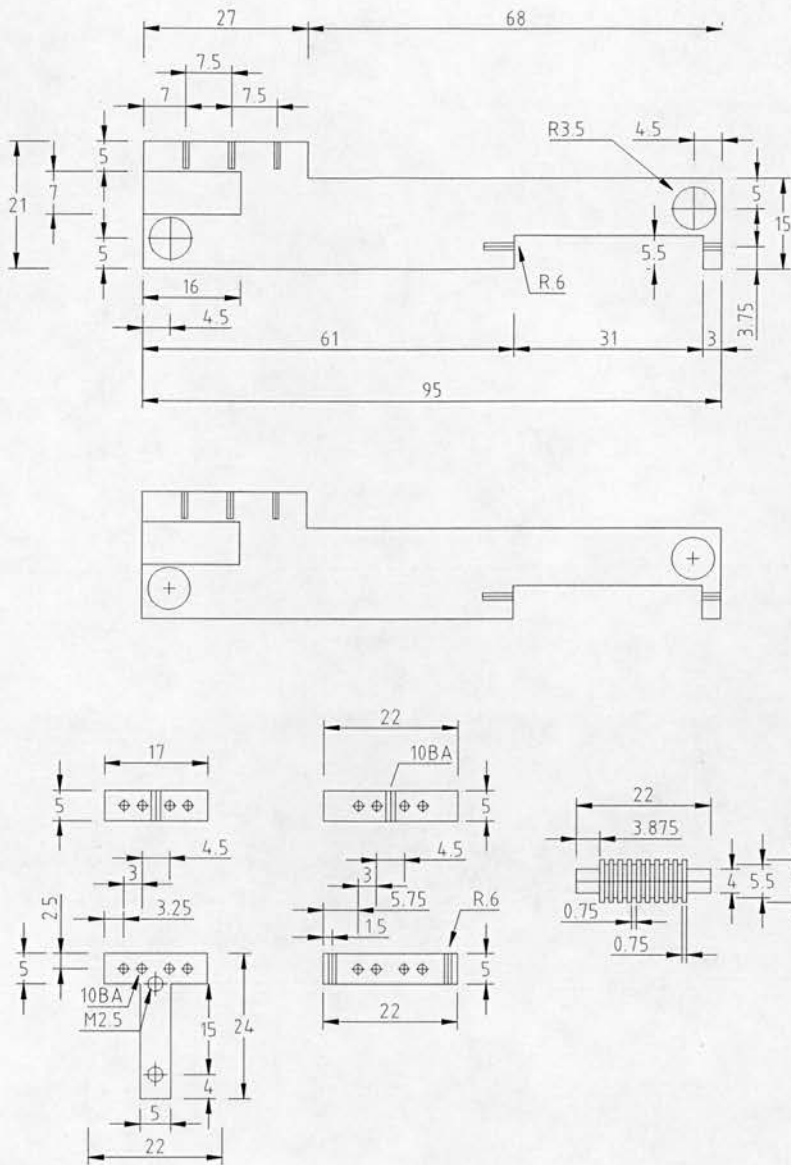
Dimensions of the main components of the SMA actuator (dimensions in millimetres).
